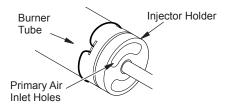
Injector Holder On Outlet Burner Tube - Rear Burner
